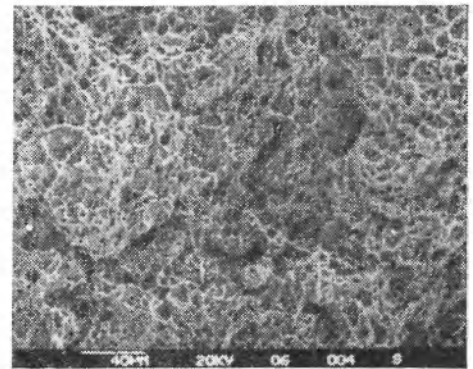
Fracture of weld-metal X 500 Fractured at 550°C, 10 kg/mm², tr= 15194 hrs.
